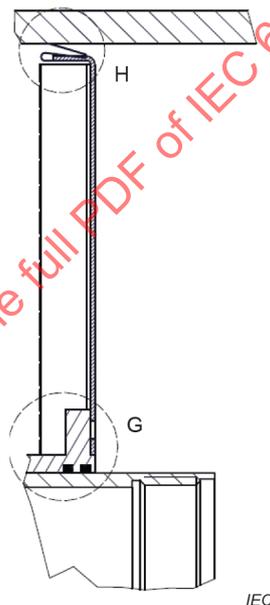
Crosscut of plane shortening housing and tube-in-tube
